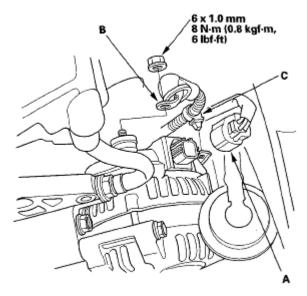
Identifying Alternator Connector, BLK Wire And Harness Clamp
